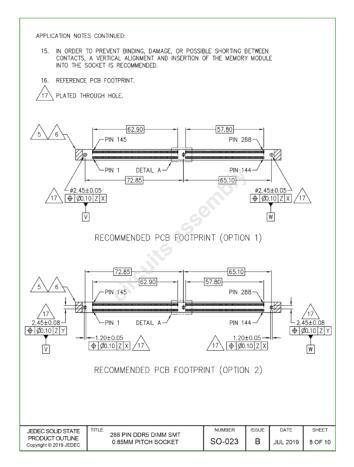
Jedec-recommended PCB footprint options for a DDR5 DIMM 0.85mm pitch 288-pin SMT socket.¹
